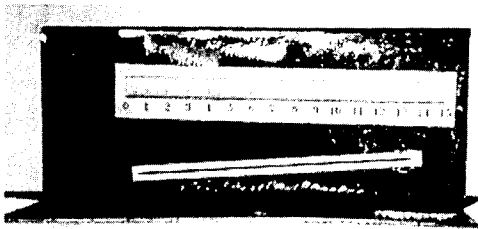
Photograph of fillet weldment after tracking weld line (offset angle = 40, welding speed = 4(mm/sec), weave length = 4(mm), weaving time = 0.3(sec), dwell time = 0.12(sec))
